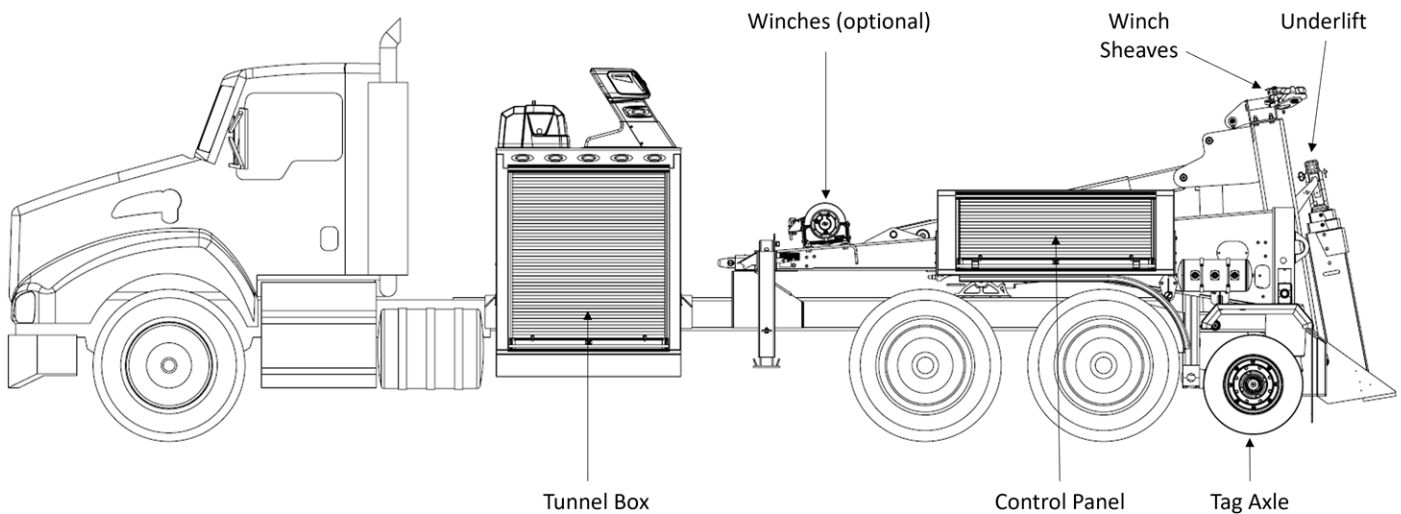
CHASSIS OF QUICKSWAP - WITH TAG AXLE
